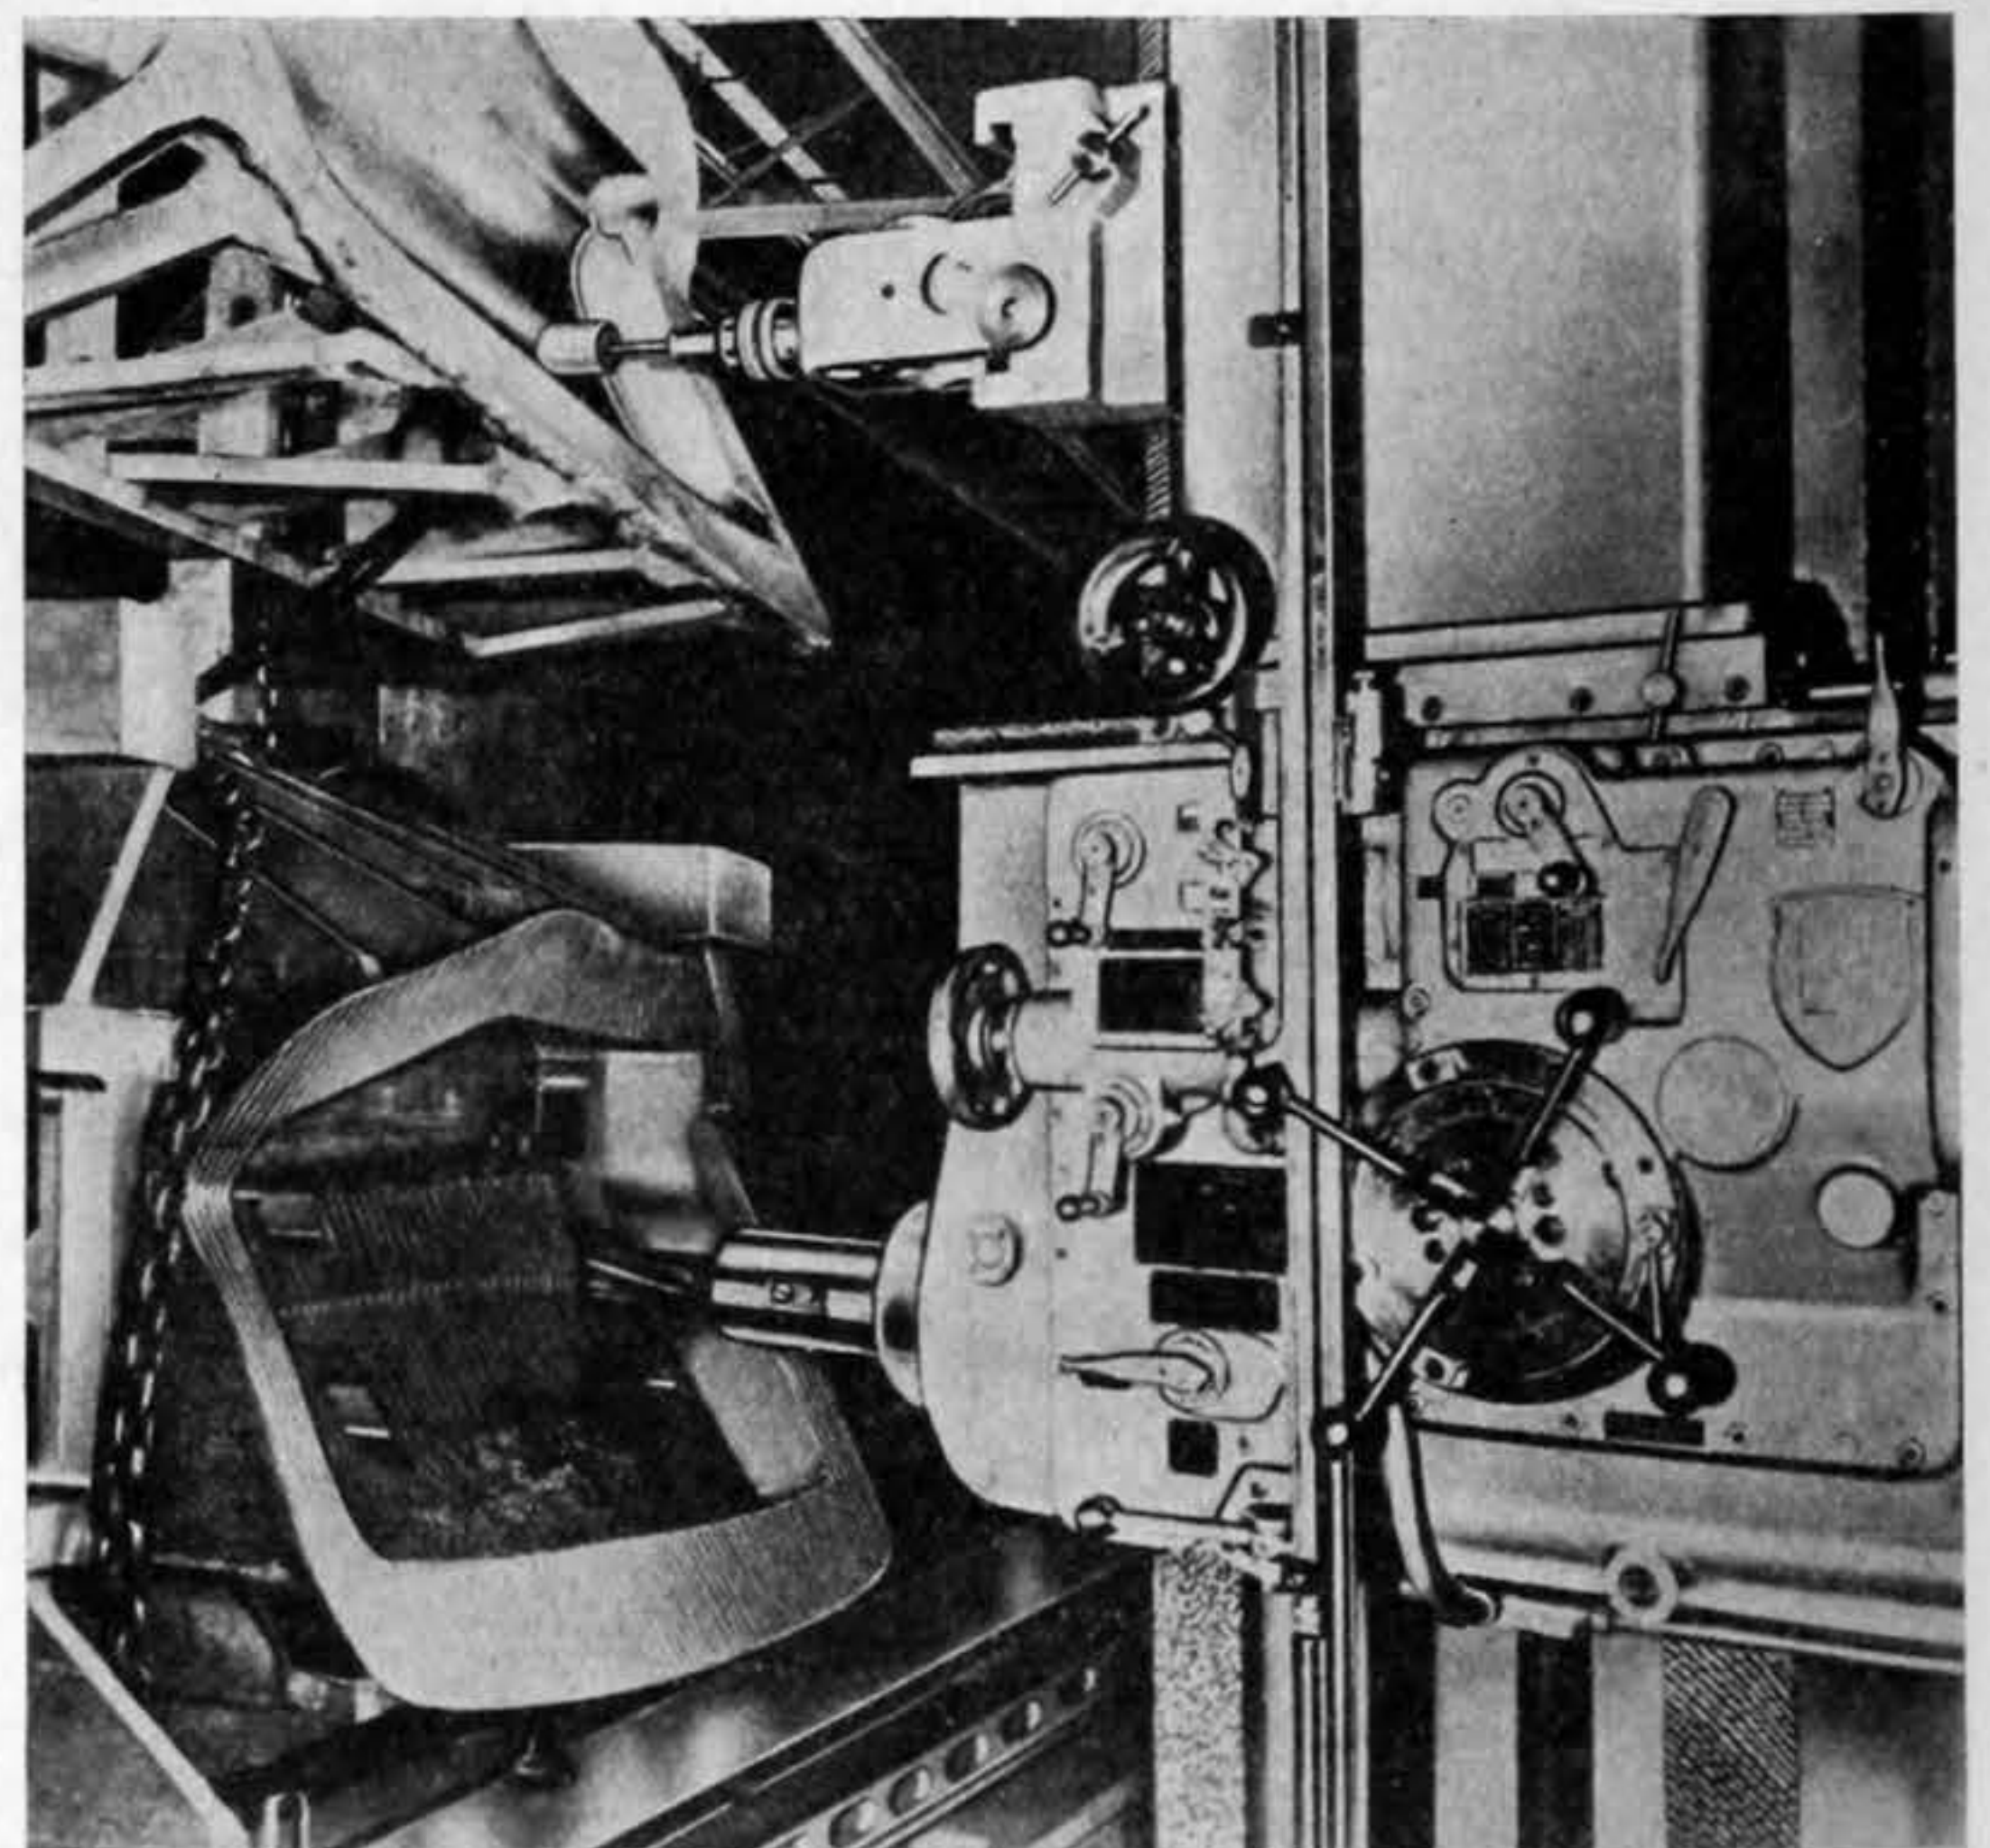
Three-dimension machining of complicated workpiece on horizontal borer
